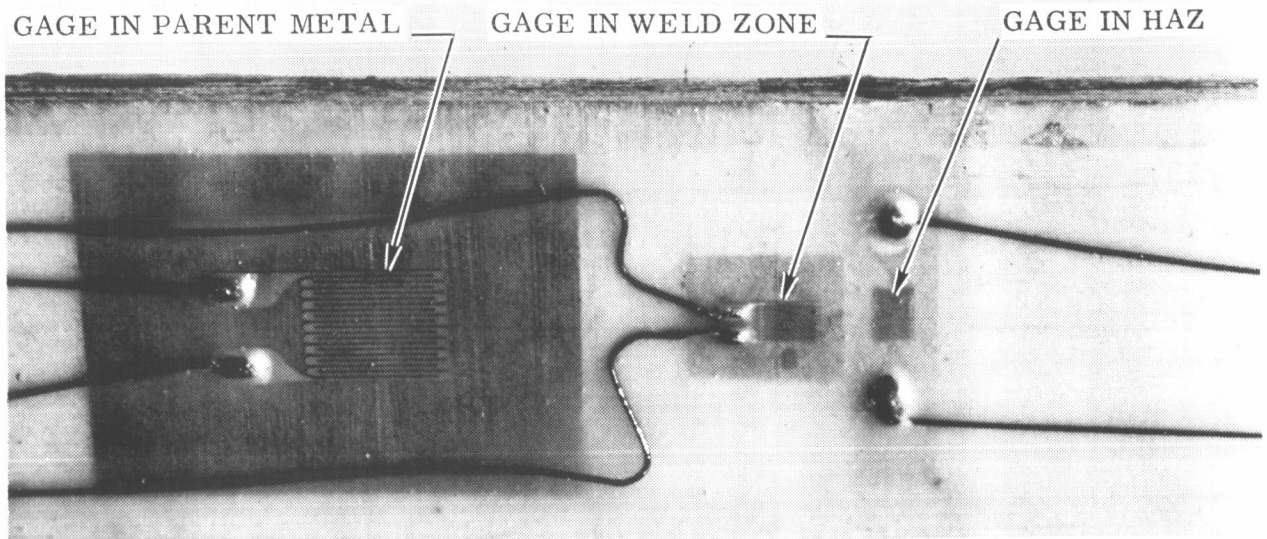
Strain Gage Installation on Welded Sheet Tensile Specimen
